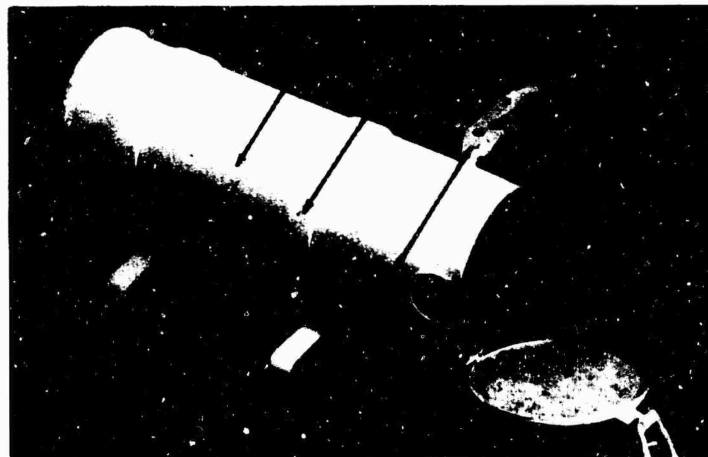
Facepiece Carrier Assembly-Protector, Facepiece, E21R2
